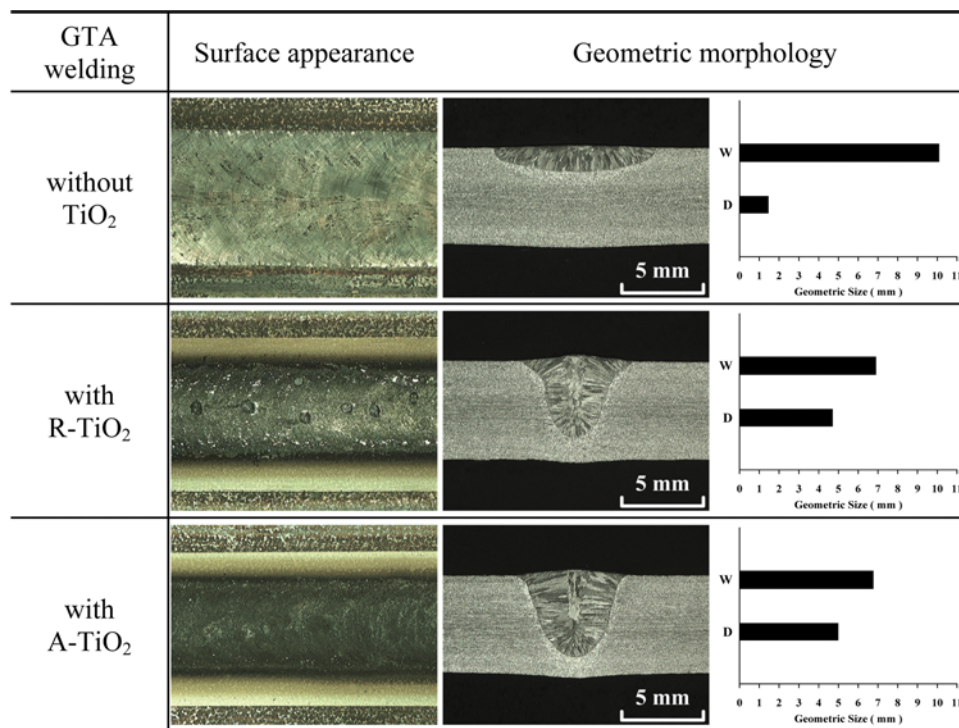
Surface appearance and geometric morphology of GTA welds made with and without TiO<sub>2</sub>.
